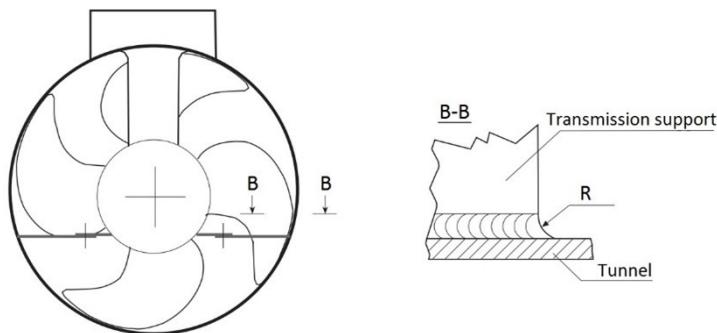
Connection between gear housing support bracket and thruster tunnel
